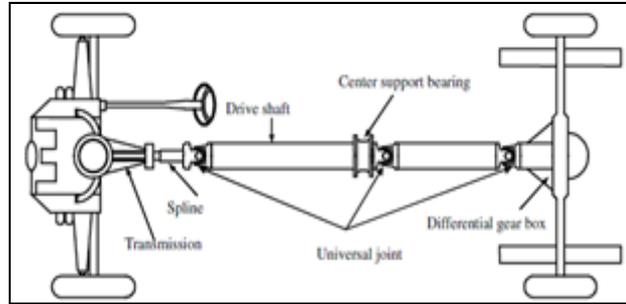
Conventional Two-Piece Steel Driveshaft [5].
